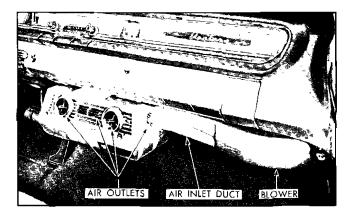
Component Parts of Pontiac Cool Pack Air System
